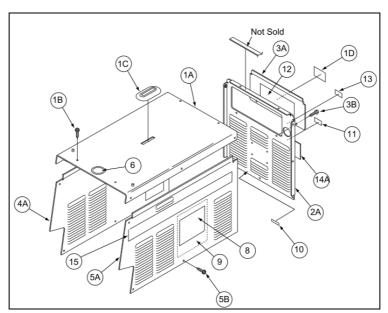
(b) Cleaning inside the welding power supply (ROBOWELD iC/H2)
